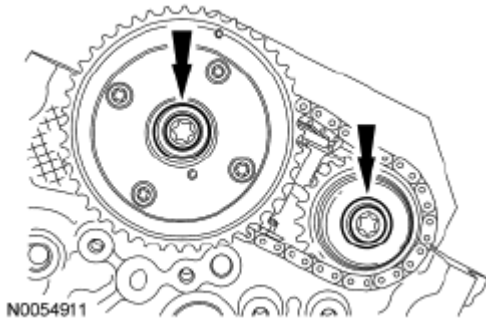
Locating VCT Bolt & Exhaust Camshaft Bolt
